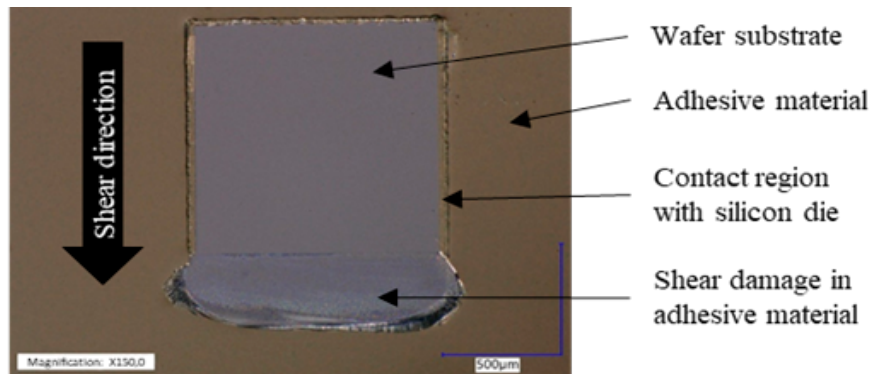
Resulting damage in the adhesive layer after shear testing (shear direction from top to bottom).
